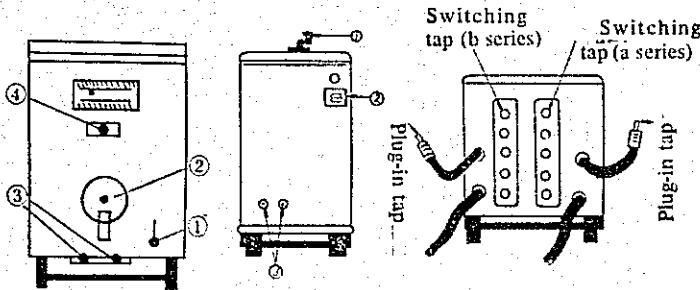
Moval iron core type welding machine Fig. 2 Moval coil type welding machine Fig. 3 Separate leg coil winding type (tap type) welding machine
